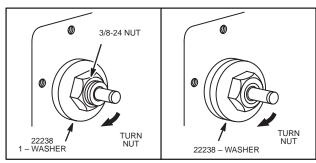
INSTALLING BUSHING AND PLUNGER
